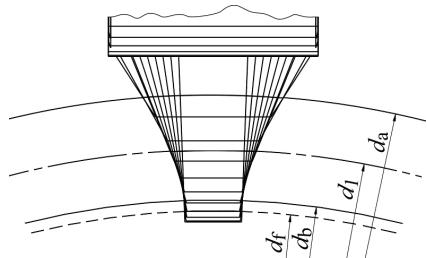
The profile of a machined gear wheel cut with all mill blades applied
